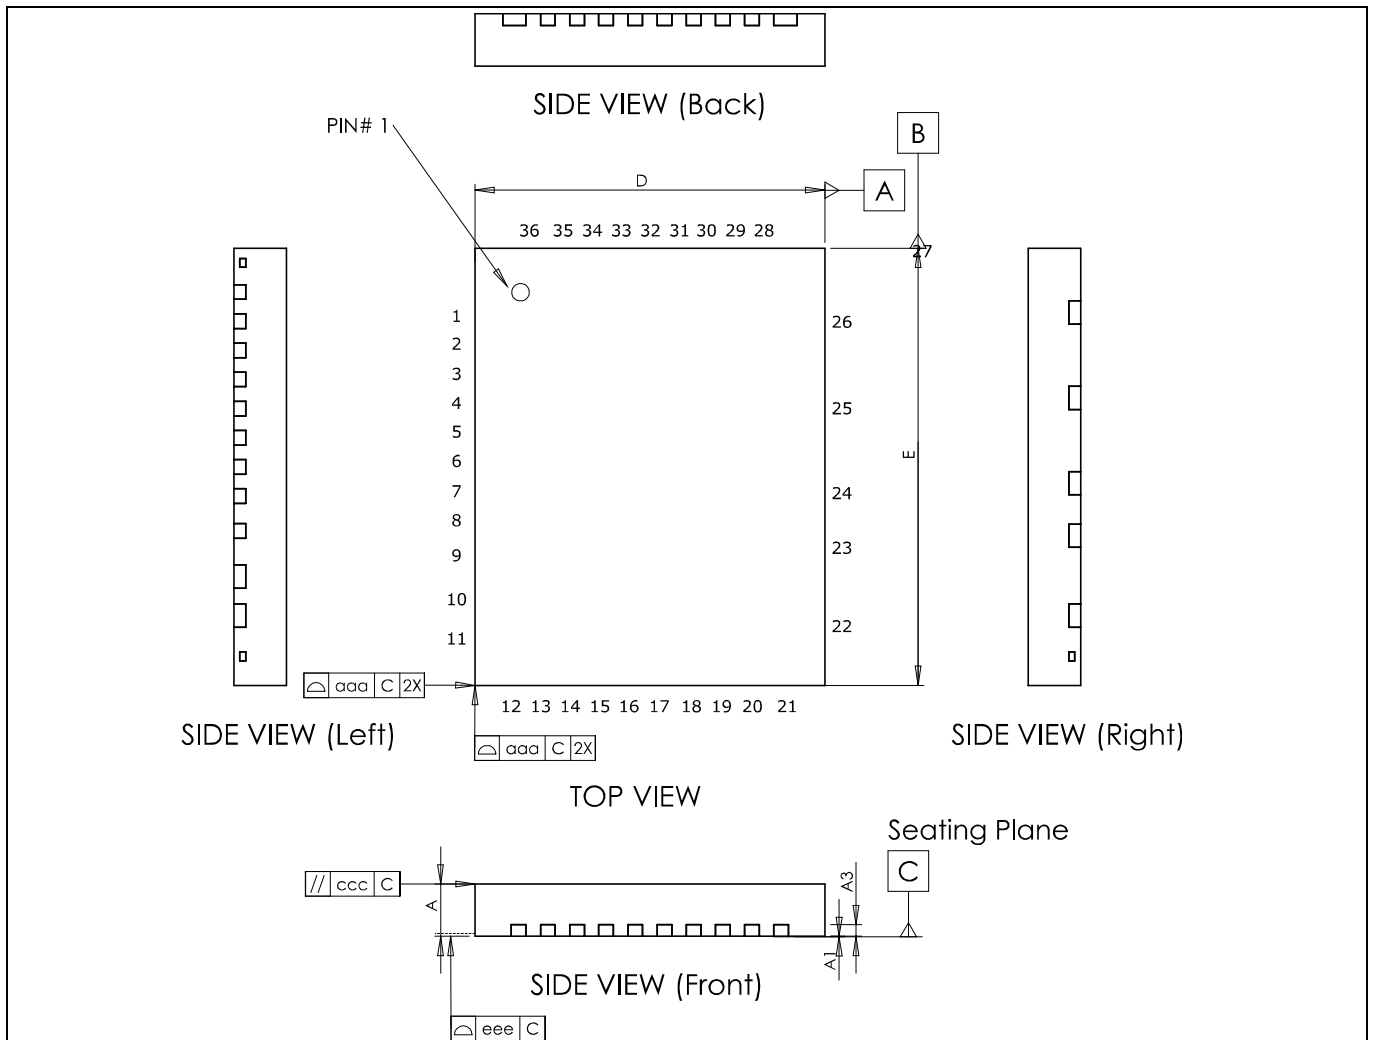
PG-IQFN-36-1 Outline Dimensions, 1 of 2
